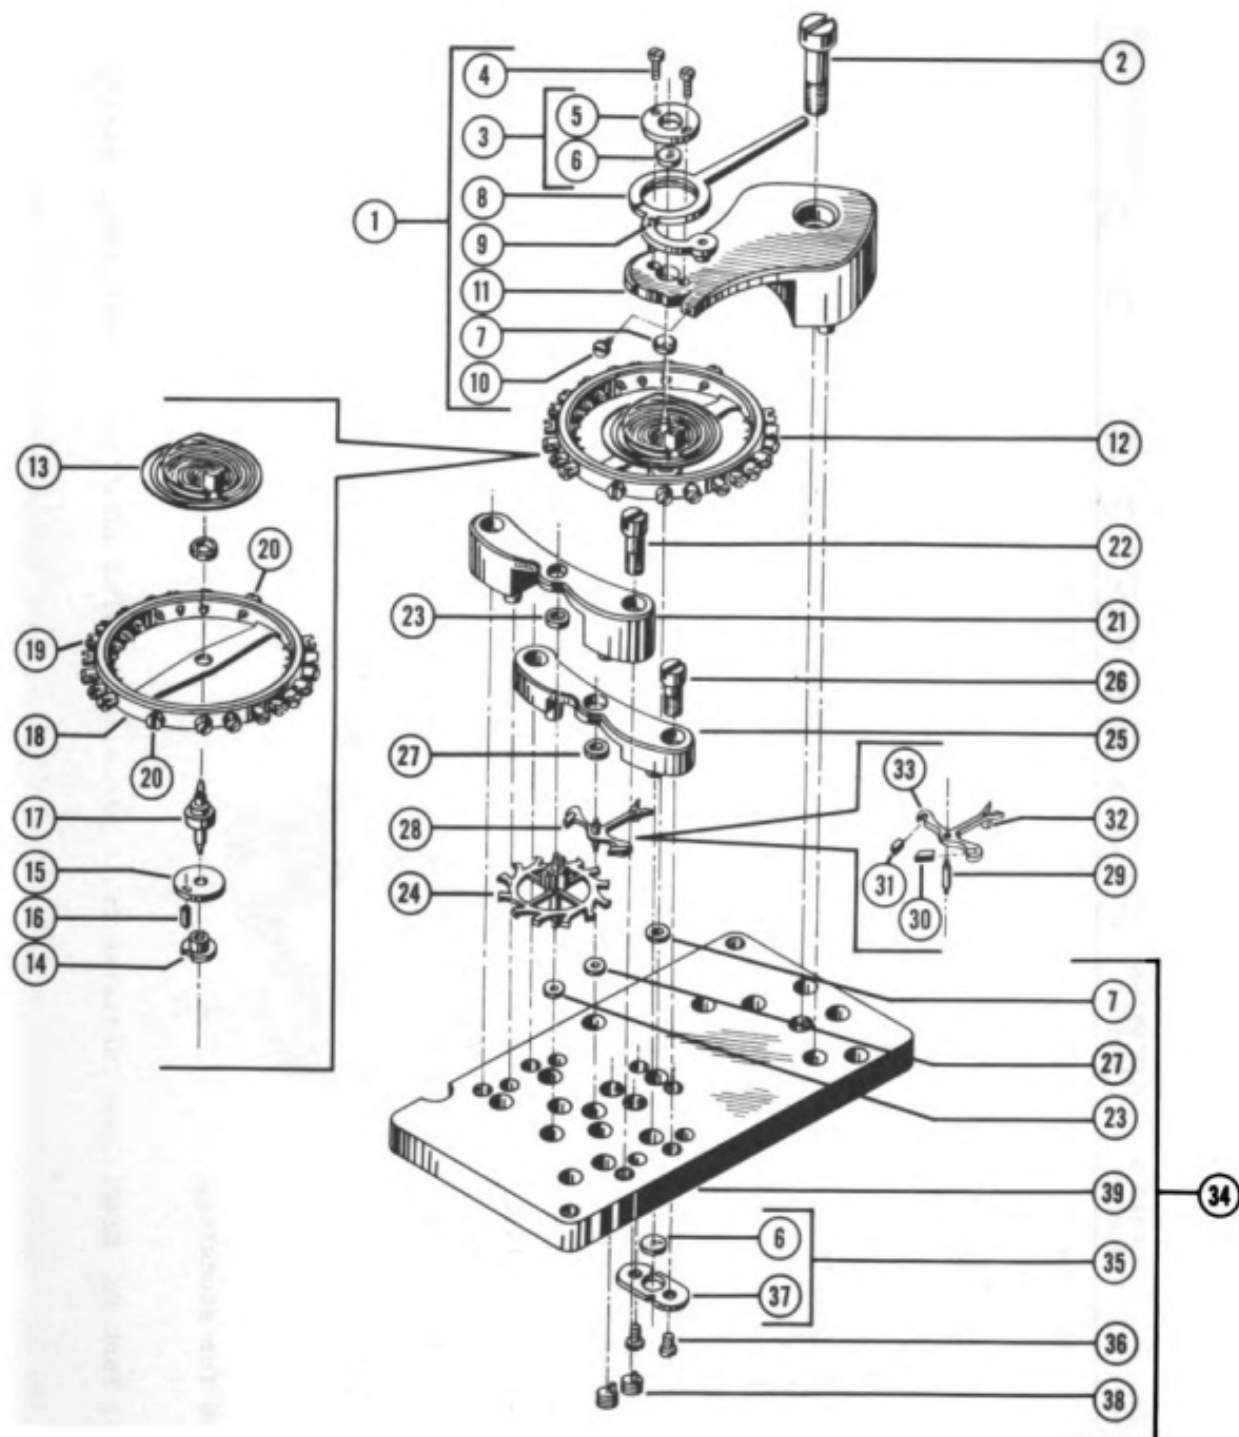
Chelsea No. 12E Mechanical Clock Escapement Assembly, No. 26—
